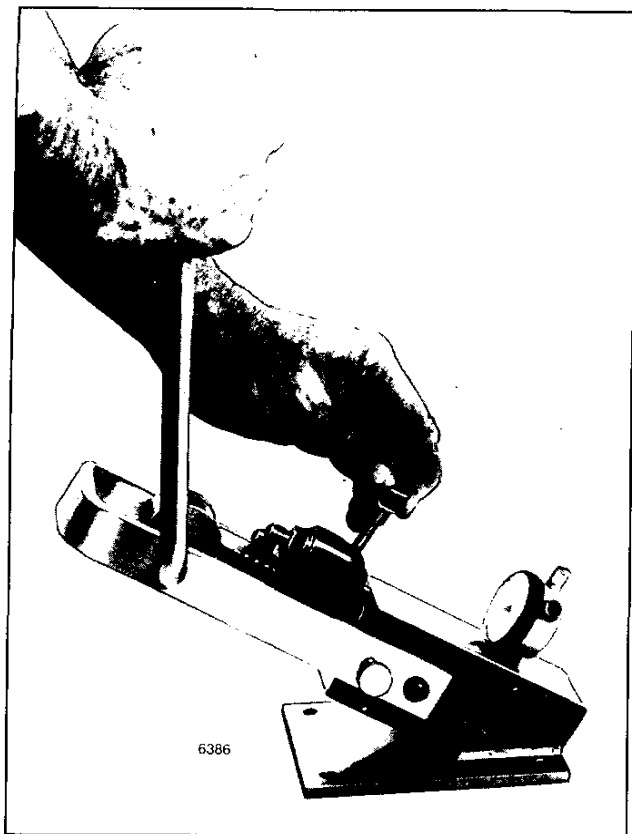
Checking Rack for Freeness in Tester J 29584
